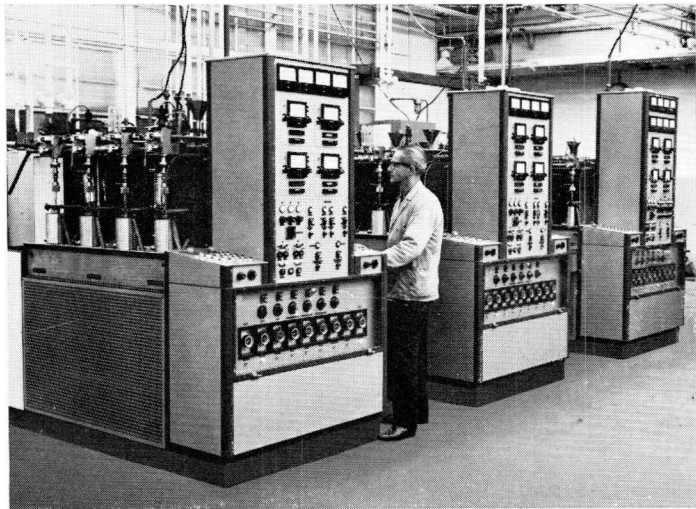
A batch of ignitron tubes being subjected to automatic pumping during the final stages of manufacture.
